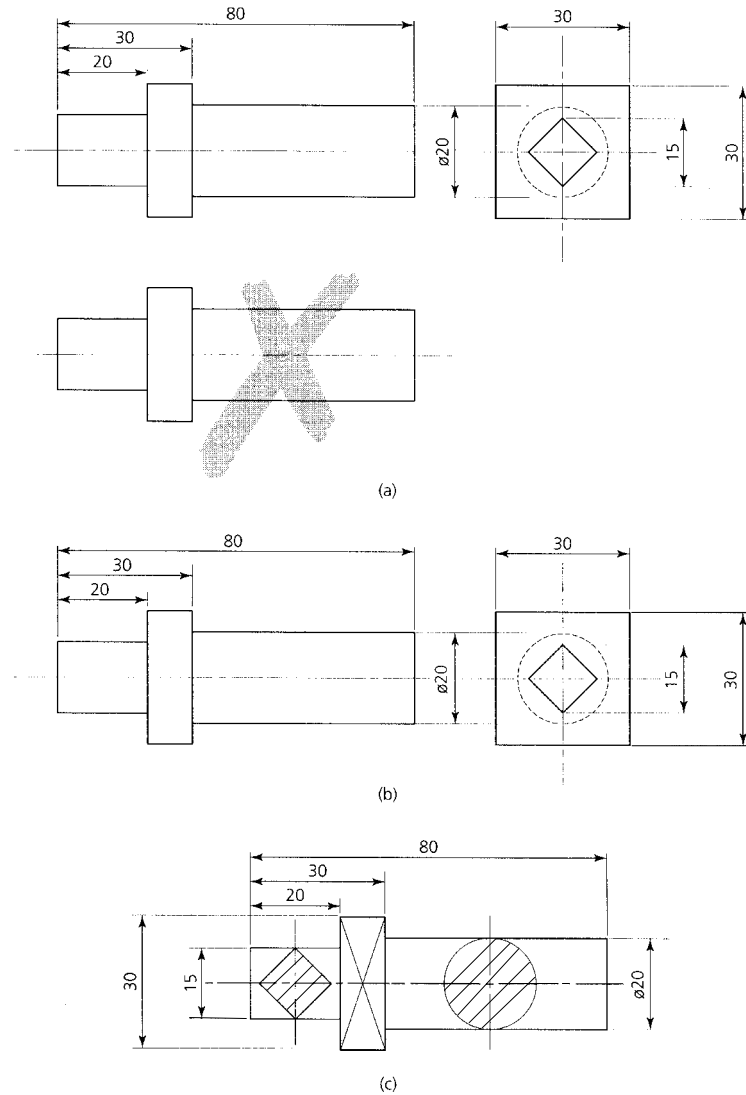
Redundant views: (a) first angle working drawing of a symmetrical component (plan view redundant); (b) symmetrical component reduced to two views; (c) working drawing reduced to a single view by using revolved sections and BS convention for the square flange
